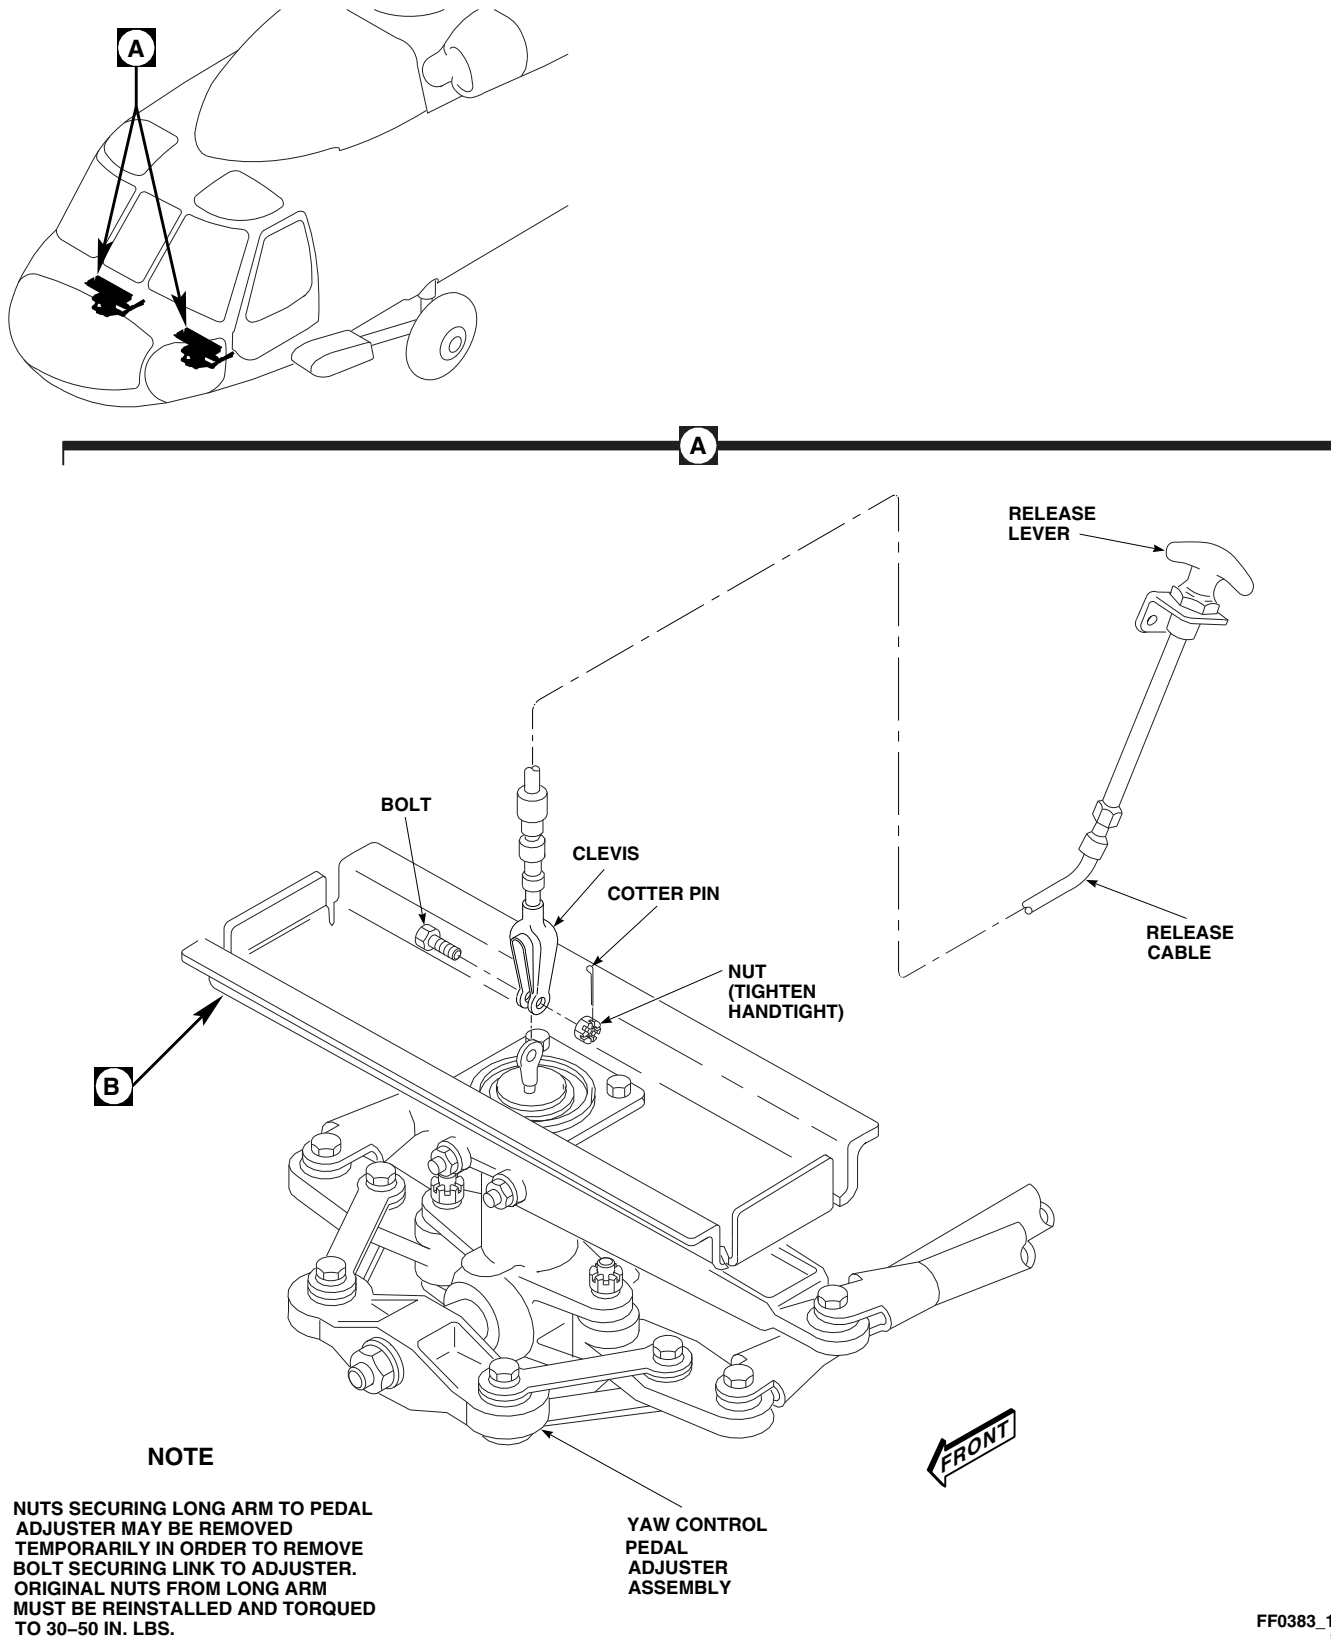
REPLACE YAW CONTROL PEDAL ADJUSTER (SHEET 1 OF 3)
